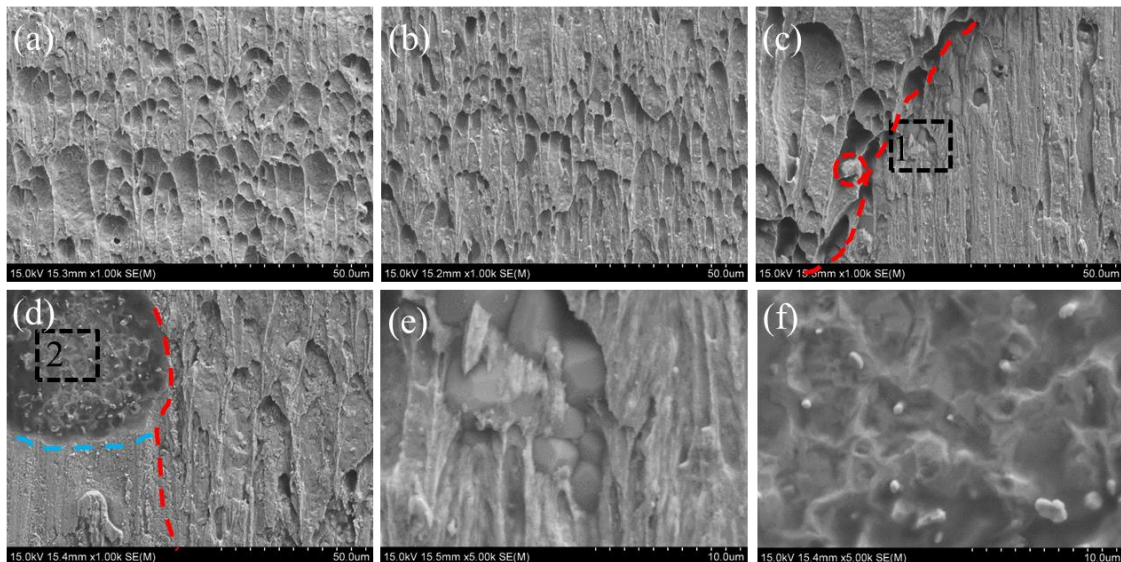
Fracture surfaces of Sn3.0Ag0.5Cu solder joint with different thermal aging times. (a) 0 h, (b) 168 h, (c) 504 h, (d) 1008 h, (e) high magnified view of area 1, and (f) high magnified view of area 2.
